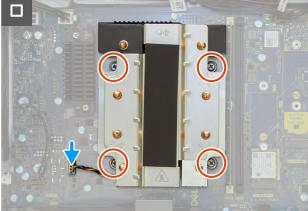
Installing the processor fan and heat-sink assembly (125 W, air cooling)
